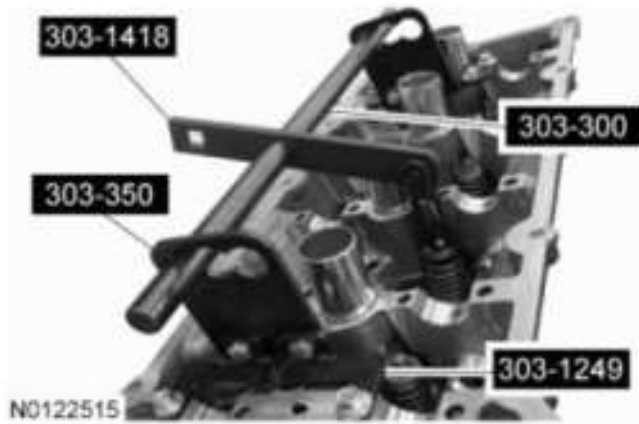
Installing Keys, Retainer And Spring Using Valve Spring Compressors
